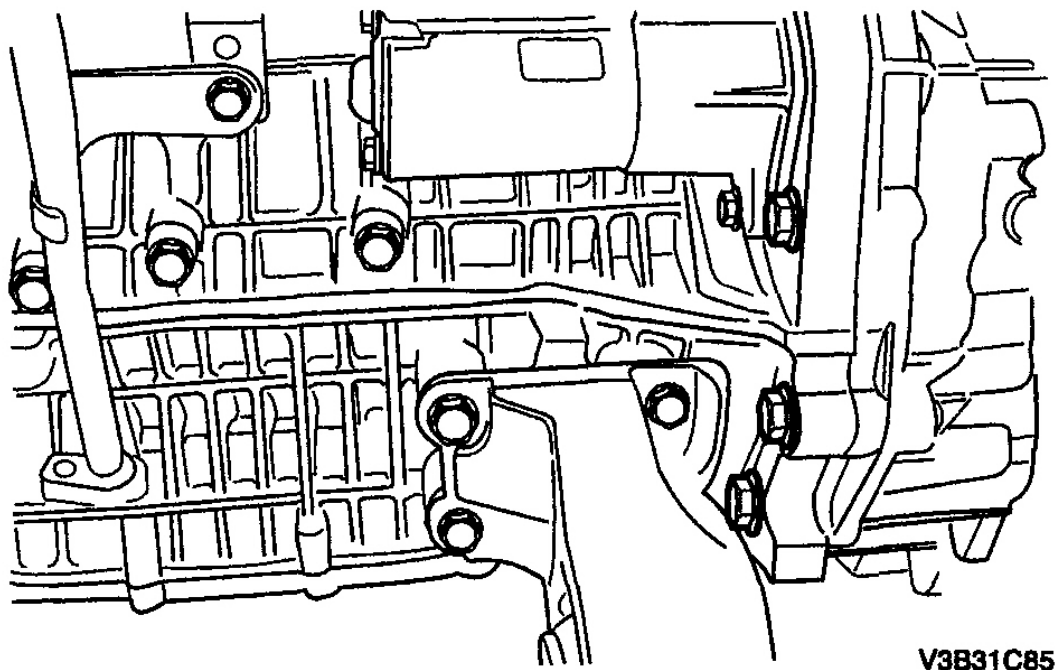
Tightening Engine Block- To-Transaxle Bolts
